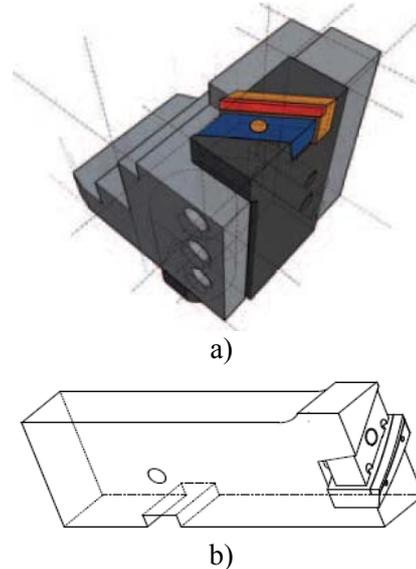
The rotational turning tool mountable into a turret of a lathe: a) 3D view of the tool, b) design of the tool [15].
